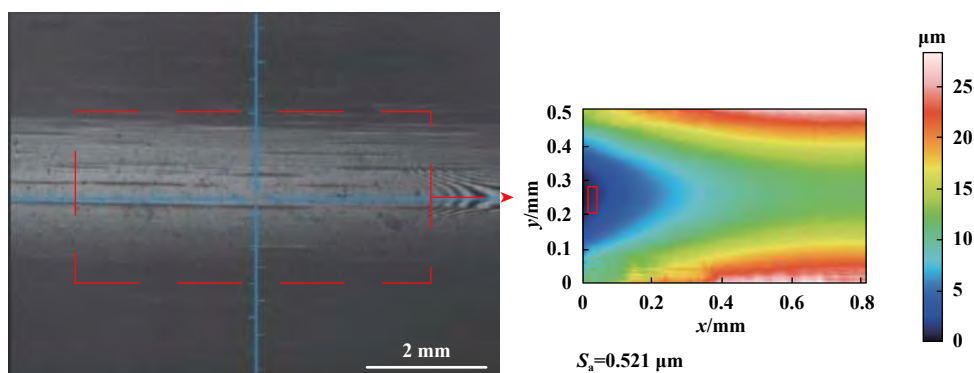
2<sup>nd</sup> bearing inner ring surface view and channel surface three-dimensional topography
